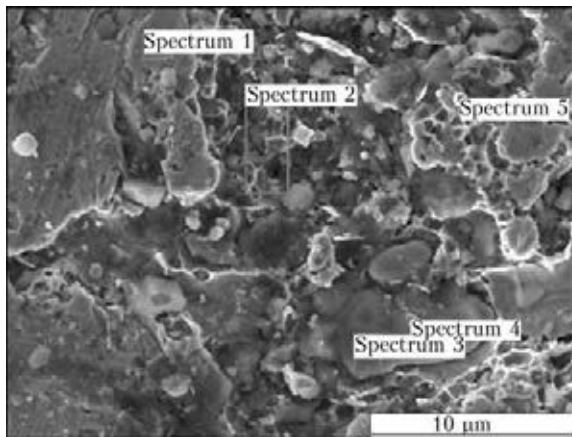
Lack of penetration on fracture surface of rail welded joint
